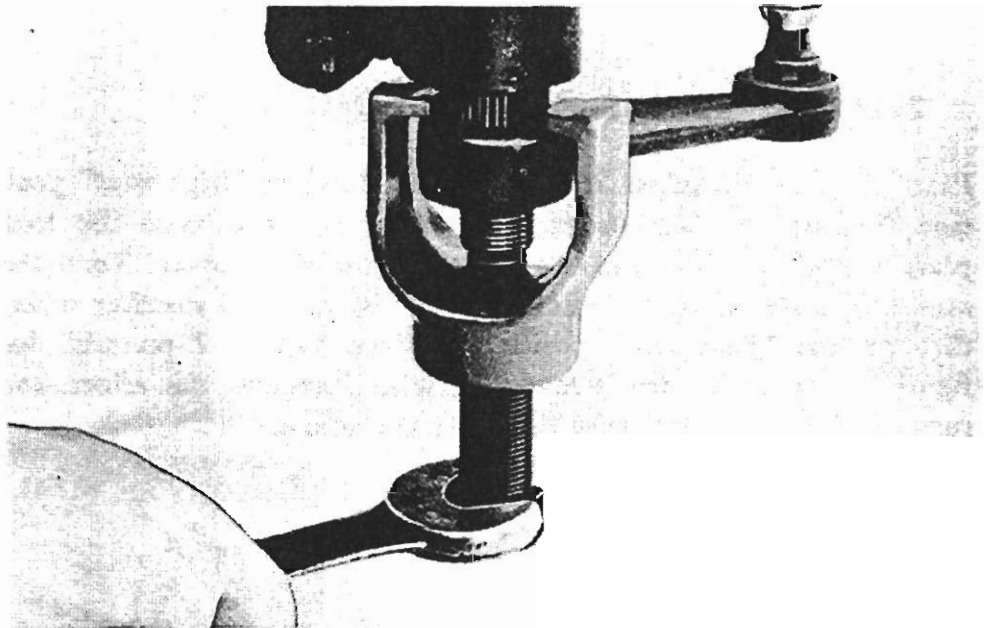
Remove the Pitman Arm Using the Puller J-2572. Do Not Hammer or Wedge the Arm Off the Shaft.
